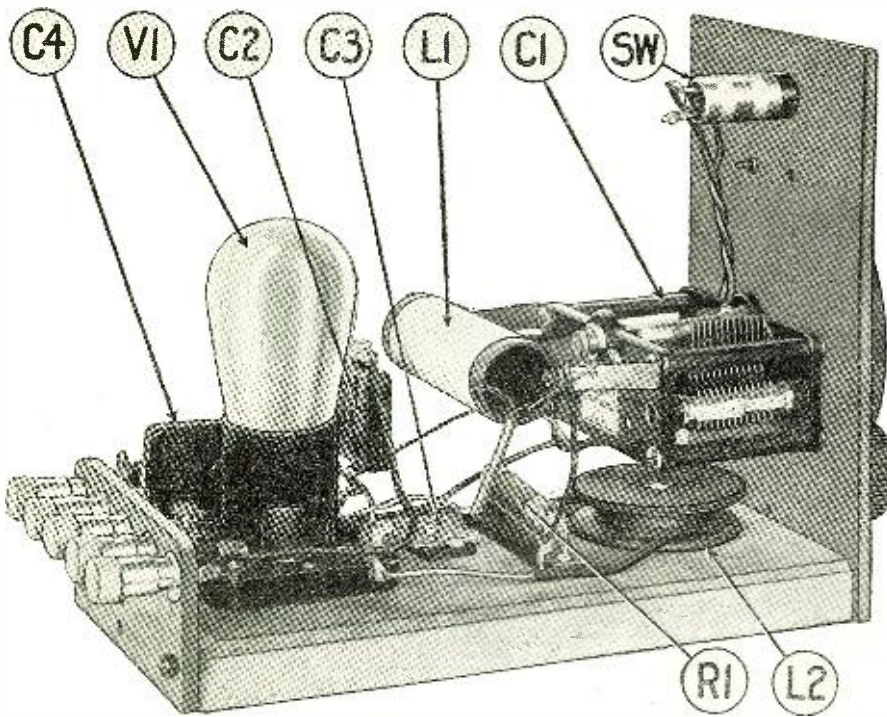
Fig. C. The method of mounting parts is shown clearly in this view of the booster unit. The condensers C2 and C4 are held in place by the wiring.
